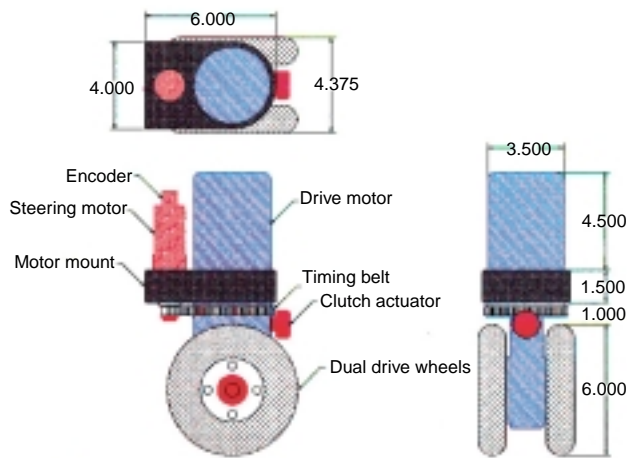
Schematic of powered steering for front wheel drive wheelchair
